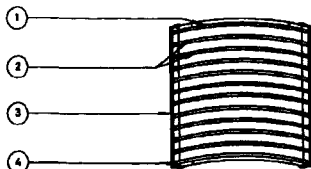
Cross section of fuel box. 1: upper cover plate; 2: fuel plates; 3: side plate; 4: lower cover plate.
